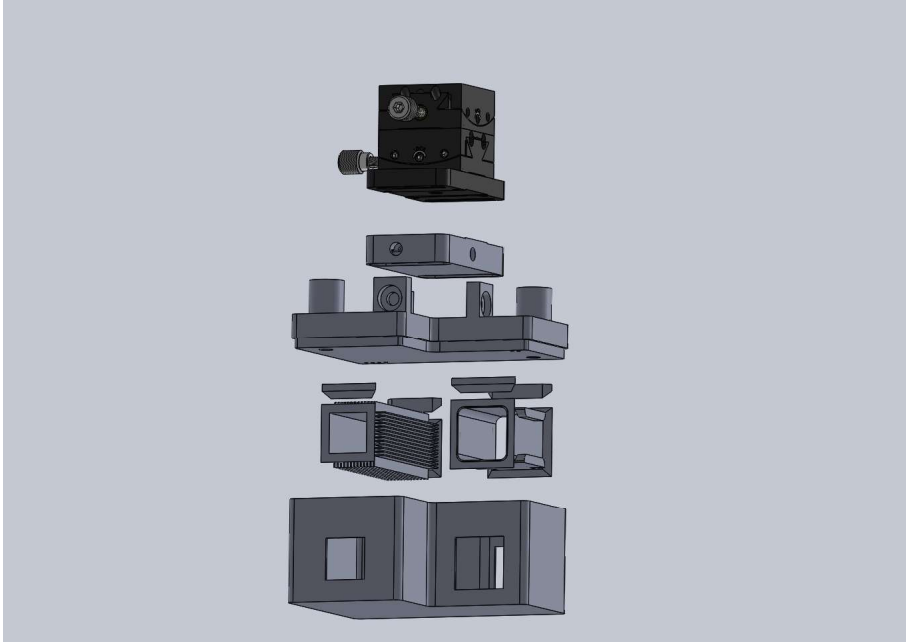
Exploded view of the current water cooler design with 5 better controllable connections.
